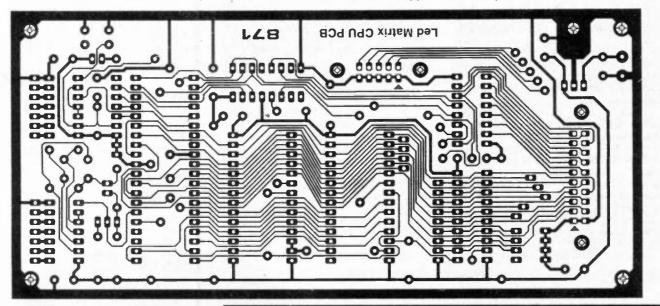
Printed circuit board component layout and full size underside copper foil master pattern for the CPU board.
